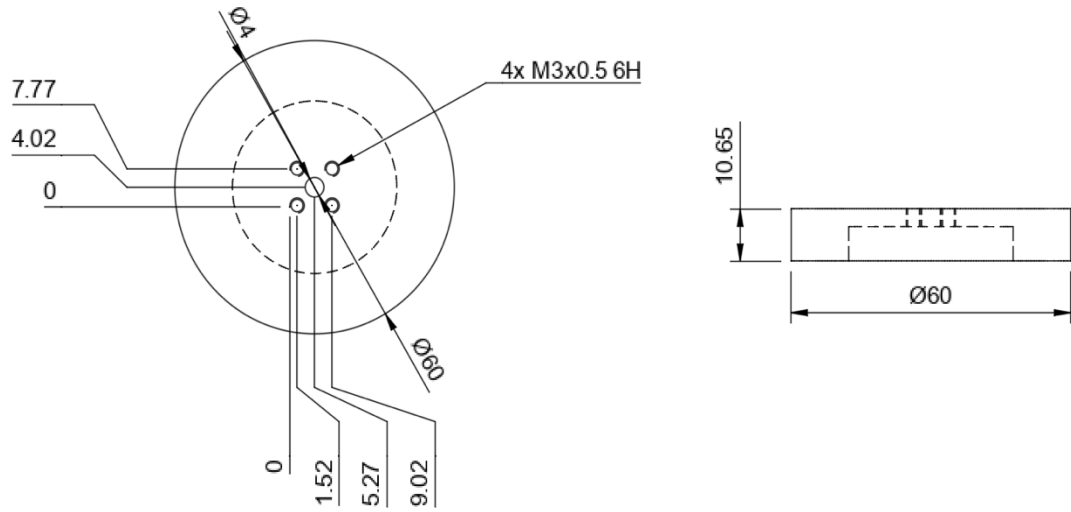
Detail 2D drawing of the momentum wheel. Left side is the top view and right side is the side view(unit in mm).
